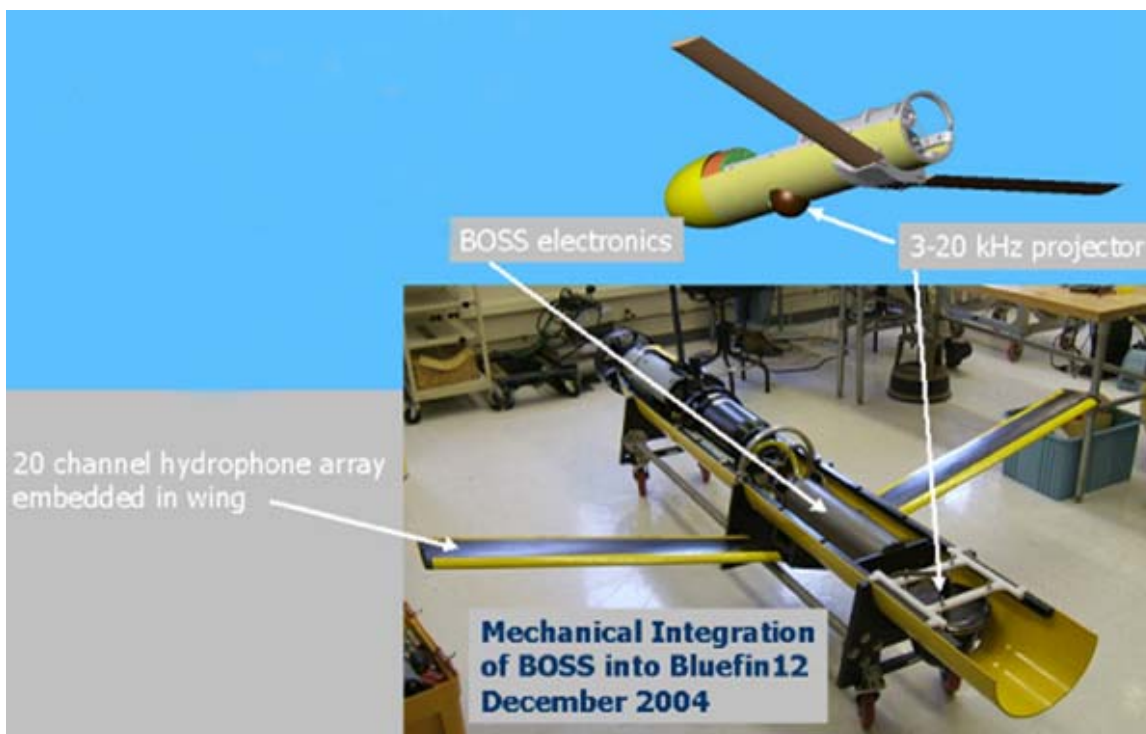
Photograph of BOSS prior to complete assembly showing some of the internal components.
